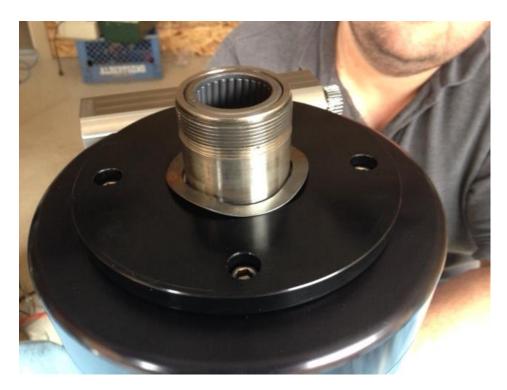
This is the first part of the installation that differs from Titan Tips. Compare to photos 8 and 9 below. The wavy washer is installed in the machined recess of the lower clutch plate BEFORE the installation of the clutch pad (see Photo 7).
